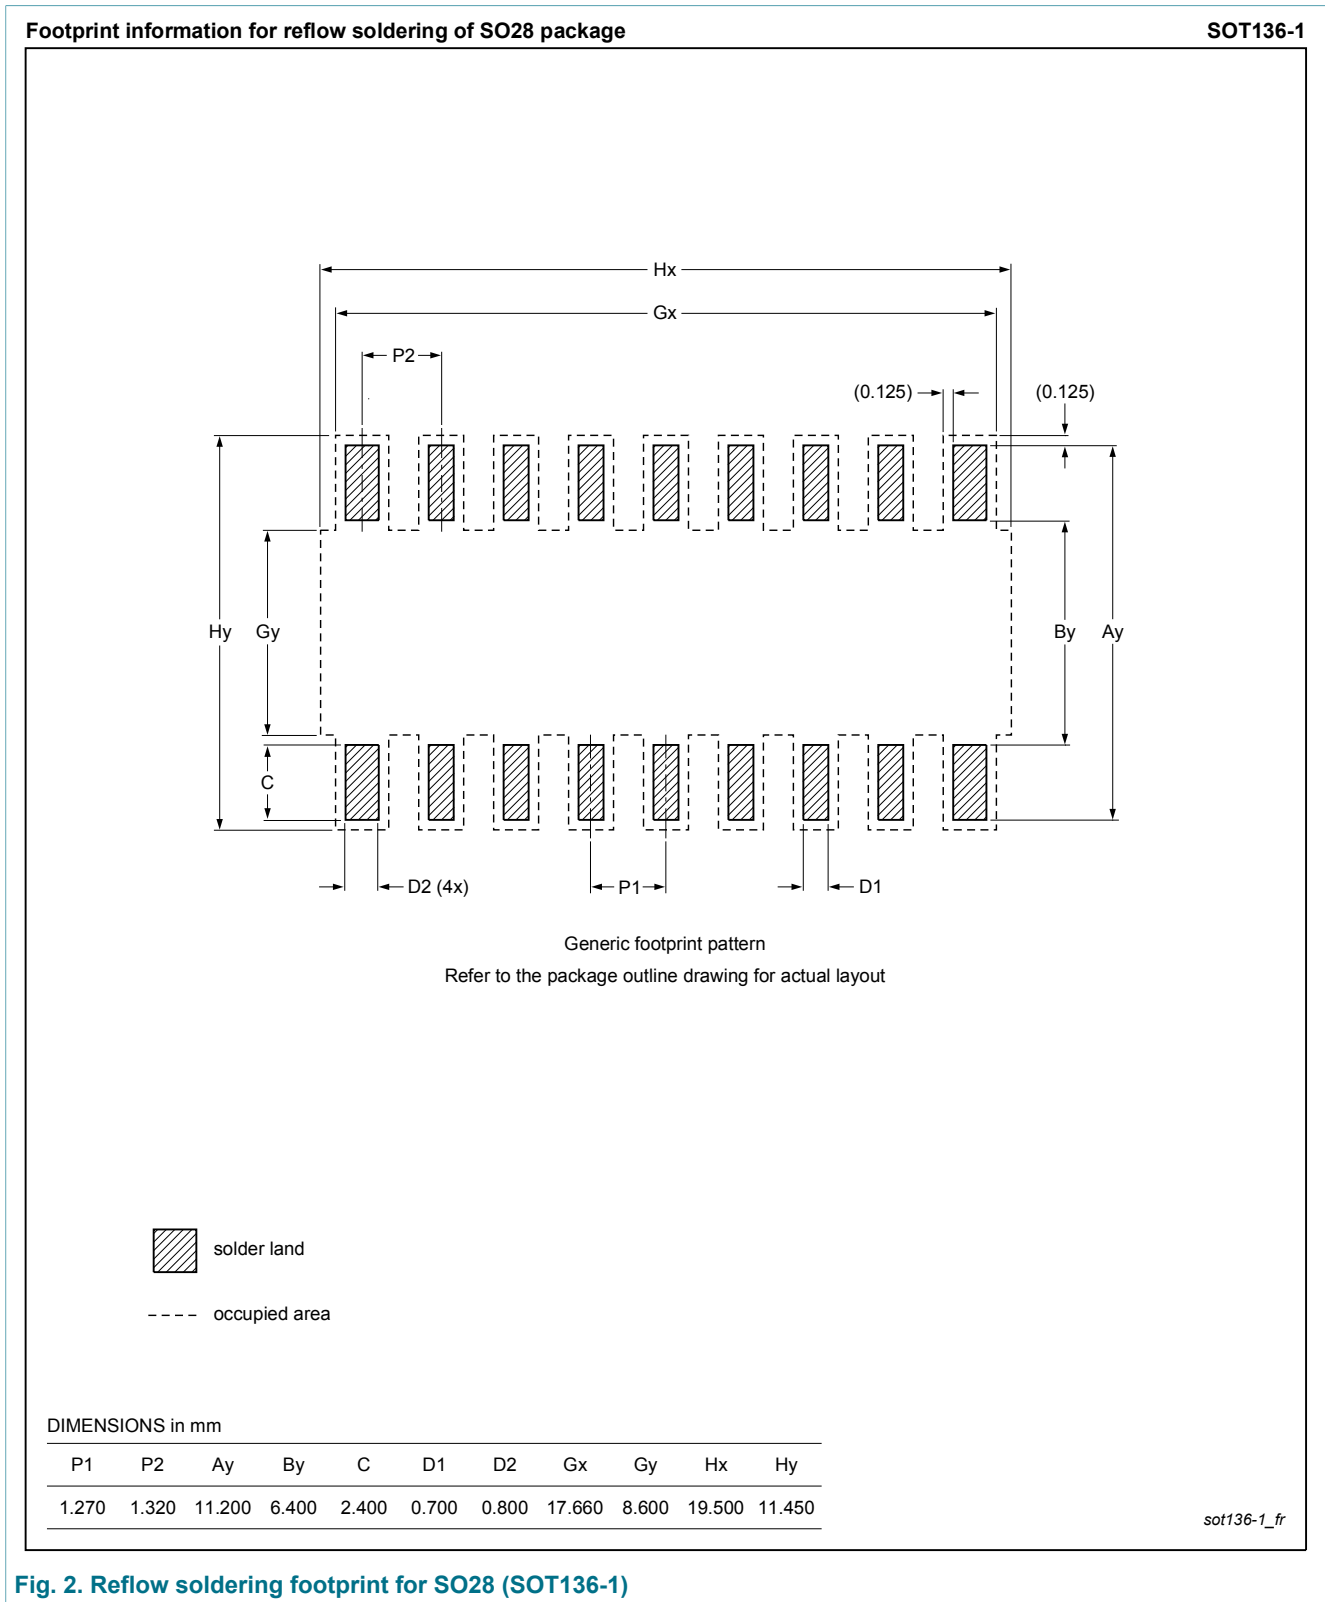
Reflow soldering footprint for SO28 (SOT136-1)
